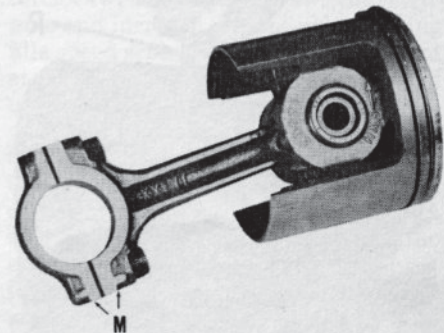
Alignment marks (M) on rod must match and arrow adjacent to "EXH" on piston pin boss must point towards exhaust port for proper installation of piston and connecting rod.
